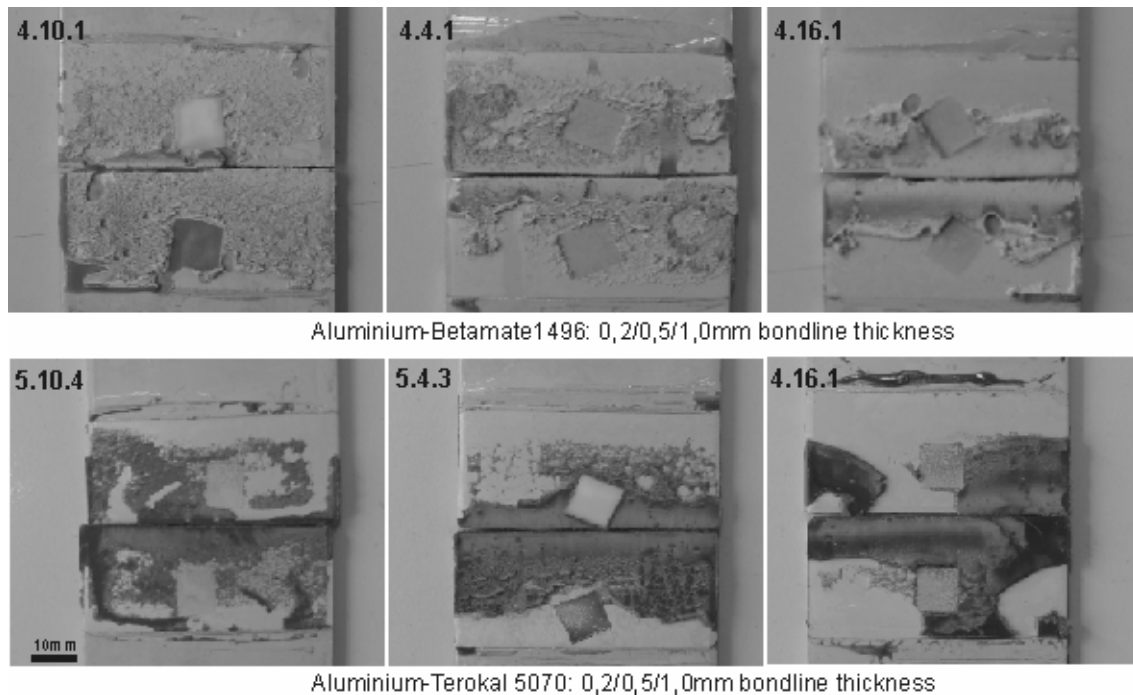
Macroscopic observations on the fracture surface of aluminium lap joints bonded with the adhesives “Betamate 1496” and “Terokal 5070” and inserted PTFE layer.
